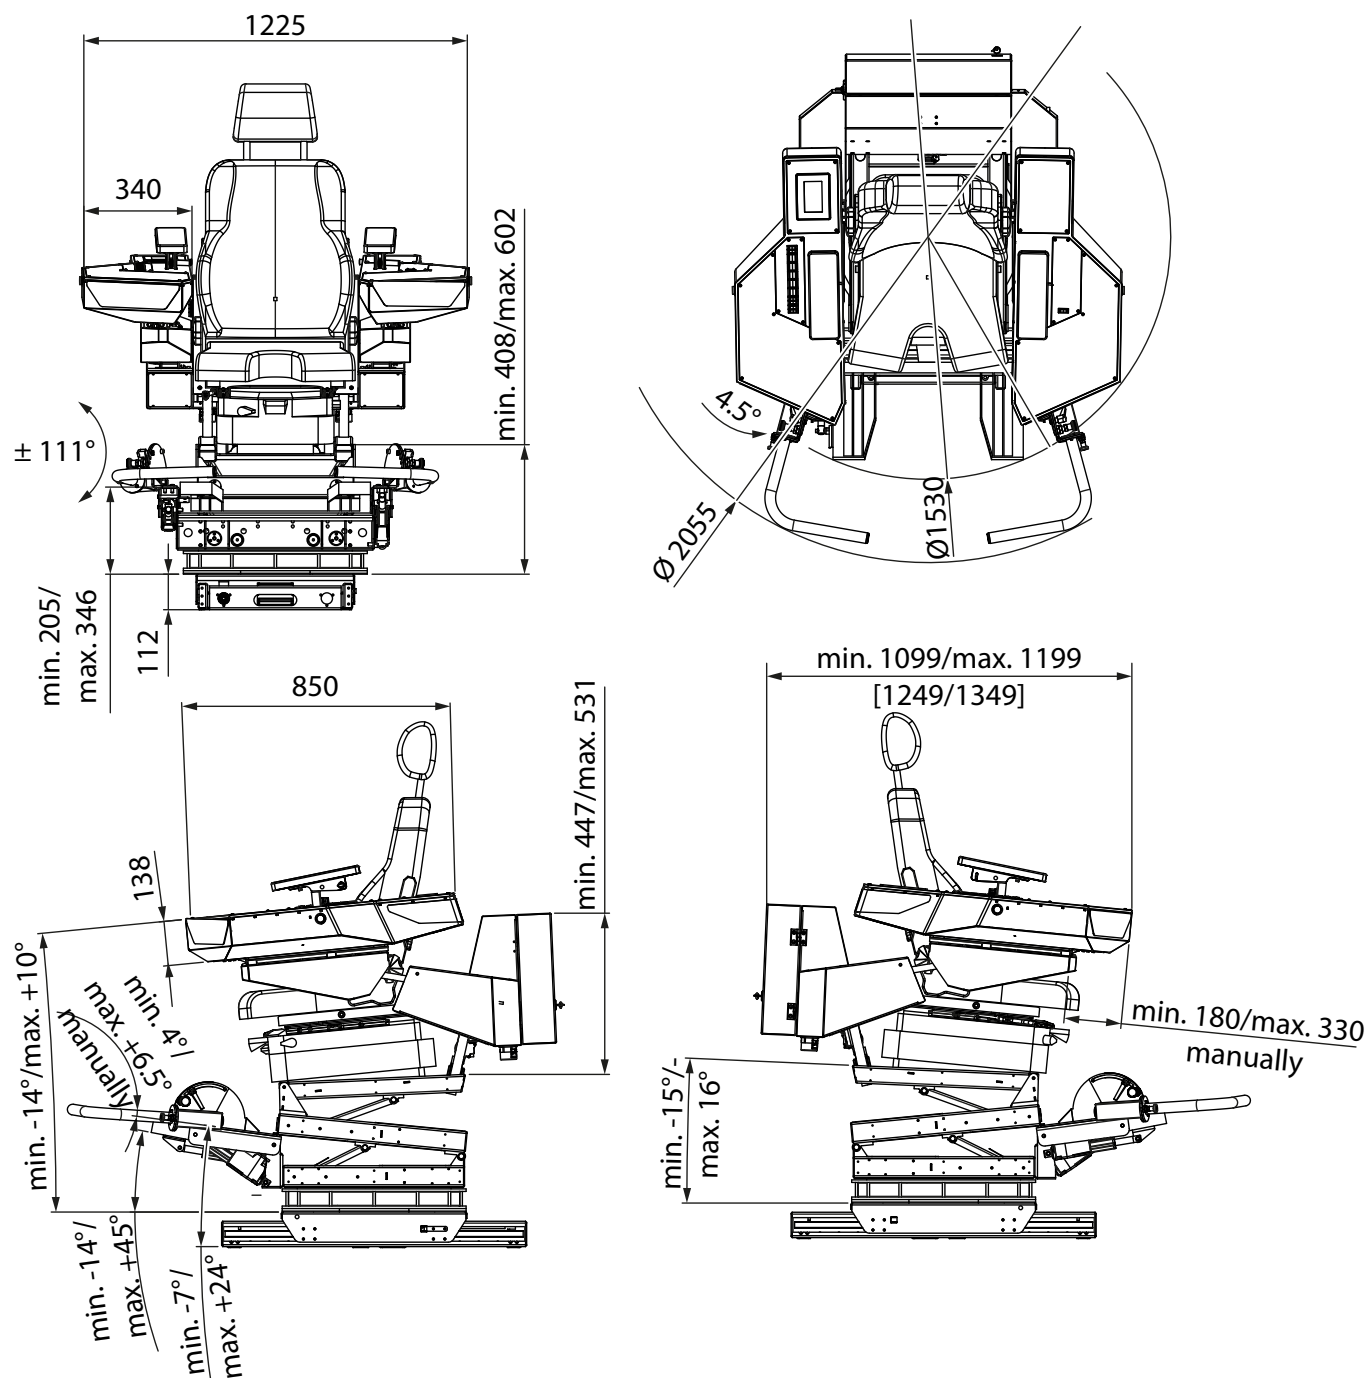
Dimensions, adjustments, working positions (dimensions in mm))
